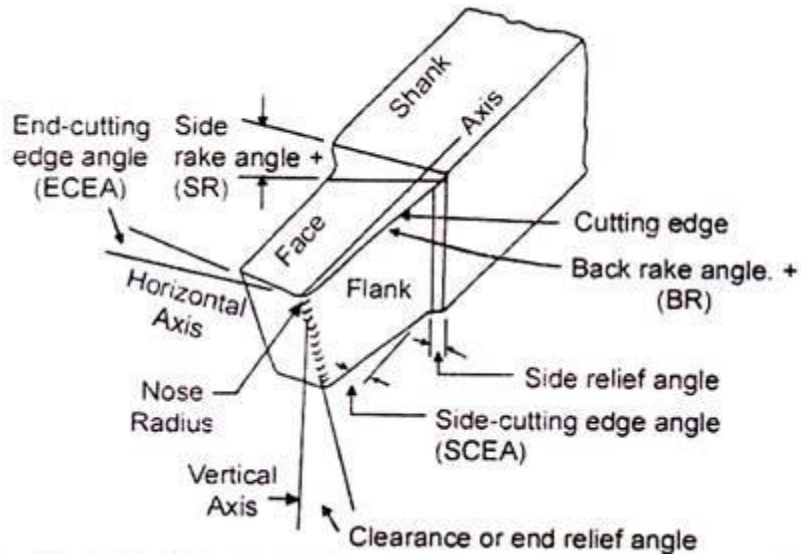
TOOL GEOMETRY OF SINGLE POINT CUTTING TOOL
